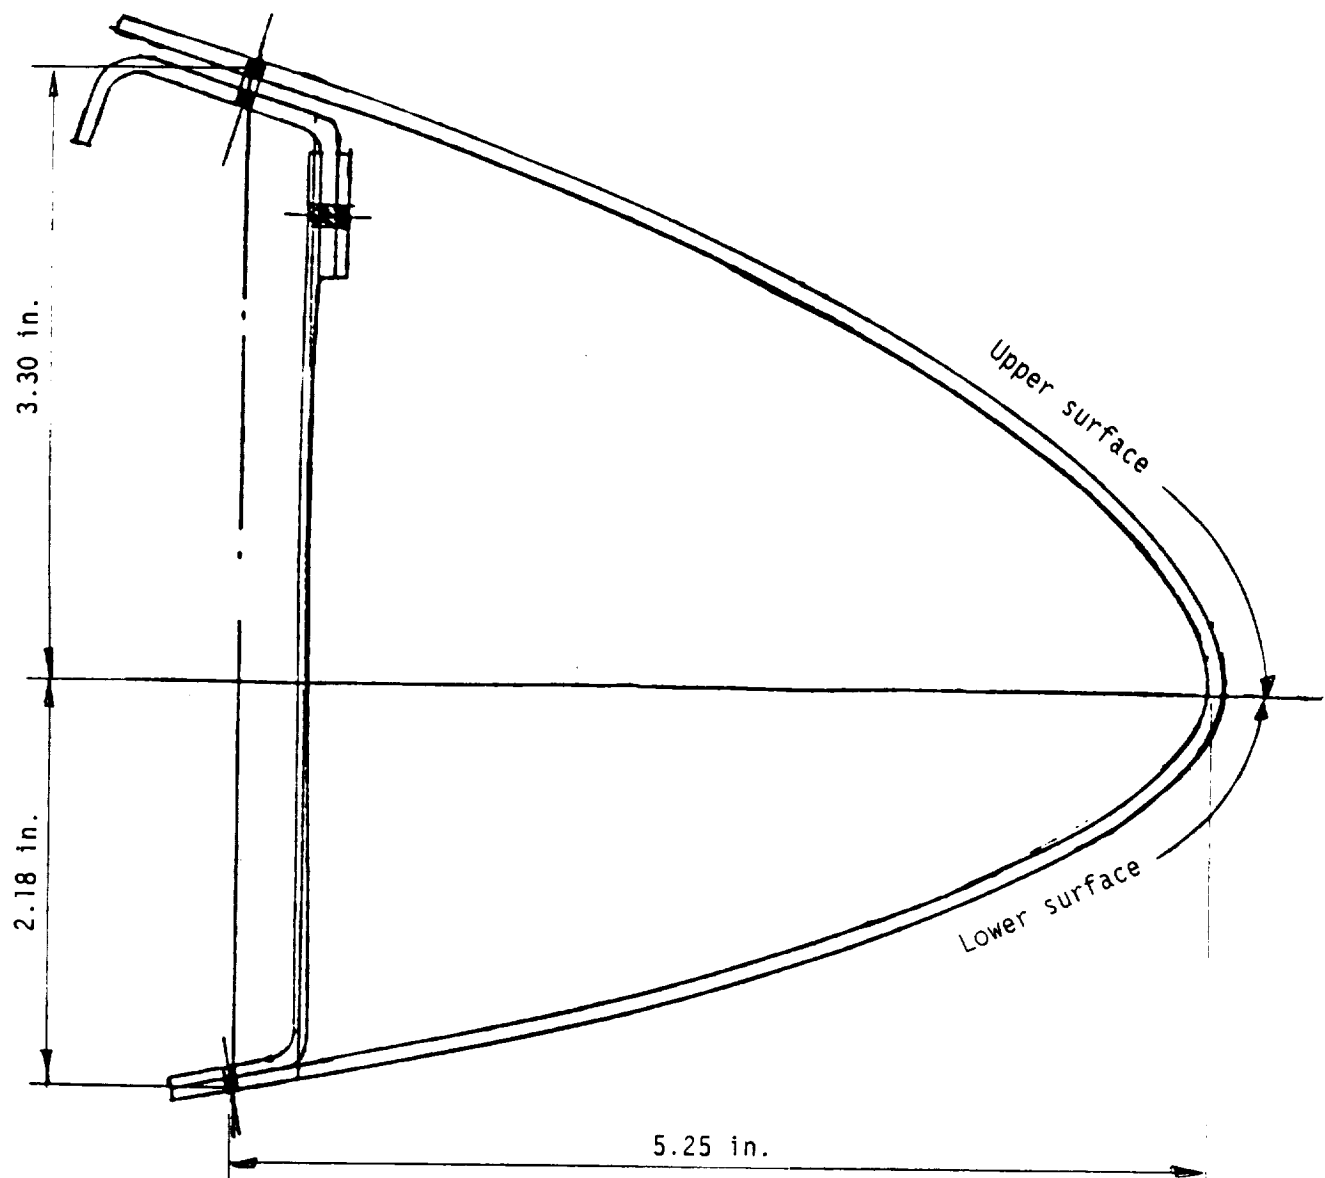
BOEING (BCAC) 767 LEADING EDGE SLAT CAVITY.
